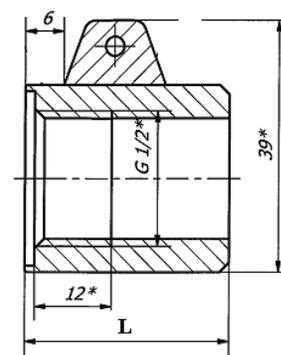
Dimensions of the fastening bushing when pipe DN ≥ 65 mm
